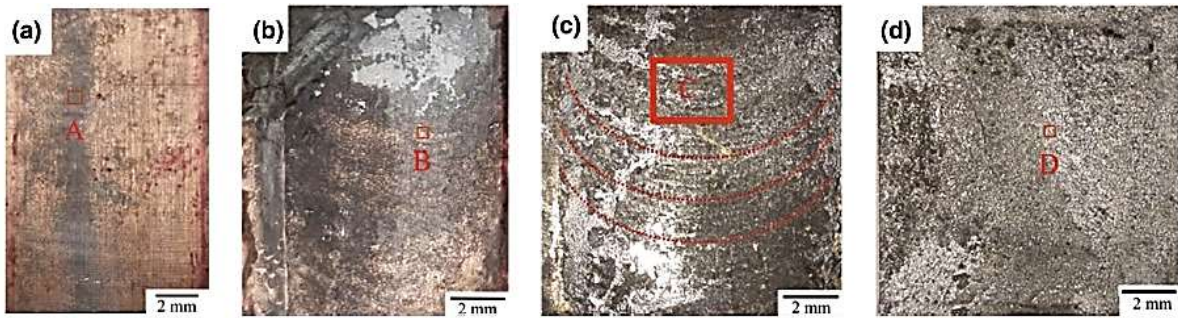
Images of the fracture surface Cu side for various shoulder diameters: (a) 7 mm, (b) 10 mm, (c) 12 mm, and (d) 15 mm [42].
